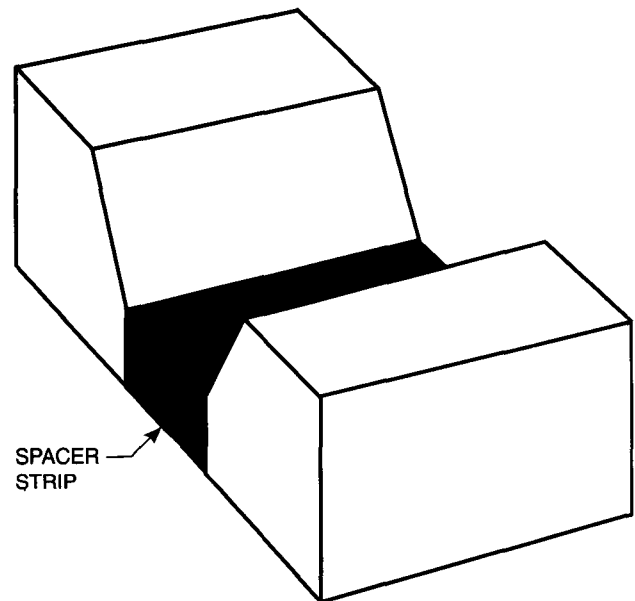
Spacer Strip Used to Maintain the Root Opening During Welding
